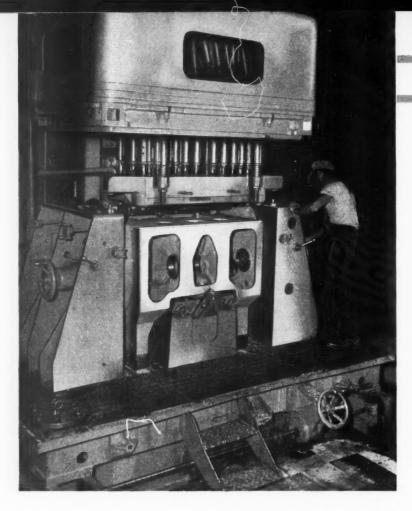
Thirty-four holes varying from 5/16 inch to 1 7/64 inches in diameter are drilled in rear face of steering-clutch case assembly in this operation
